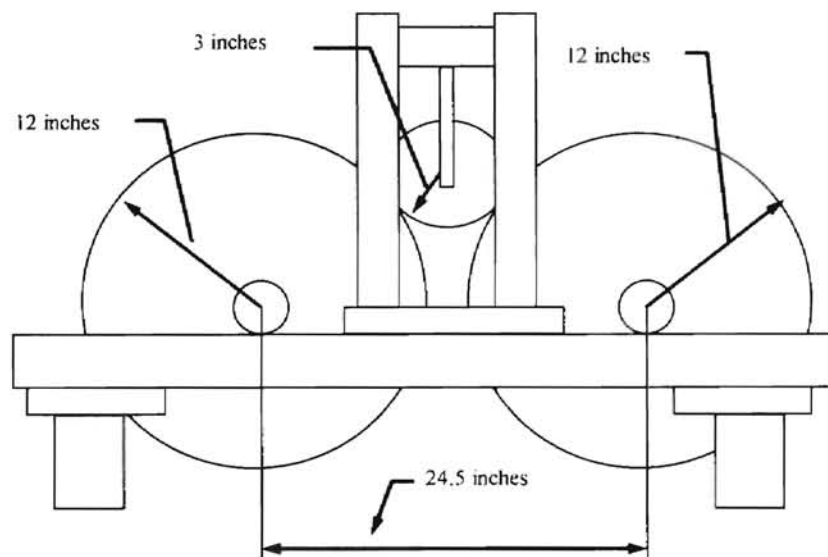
Photograph of Two Drum Winder Setup Side View
